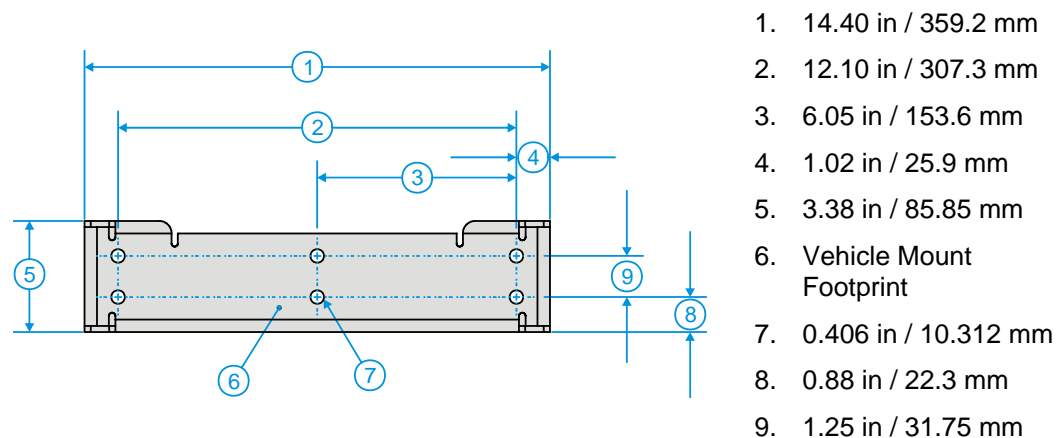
VX7 Bracket - Mounting Dimensions (Not To Scale)
